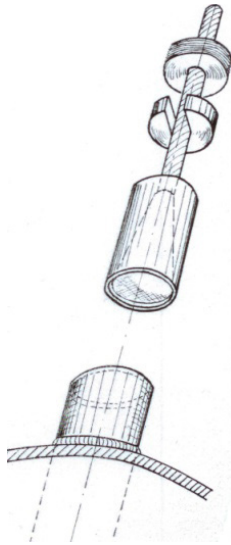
Fastening rope in sleeve with thread Fig. 4. Anchoring guy in reinforced concrete block
